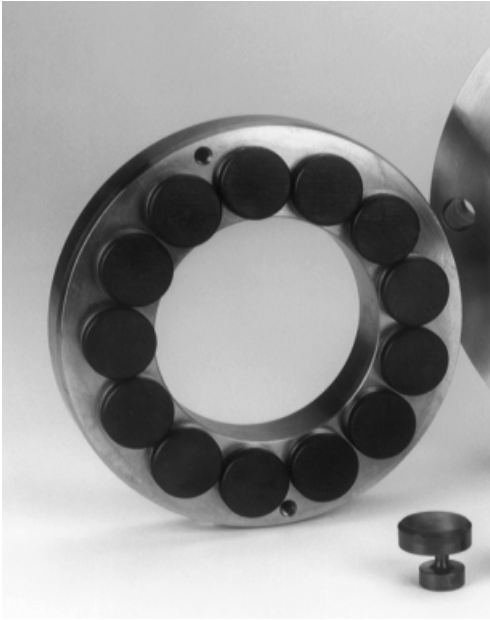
Thrust-type Flexure Pivot bearing for a small compressor. (*Bearings Plus, Inc., Houston, TX.*)
